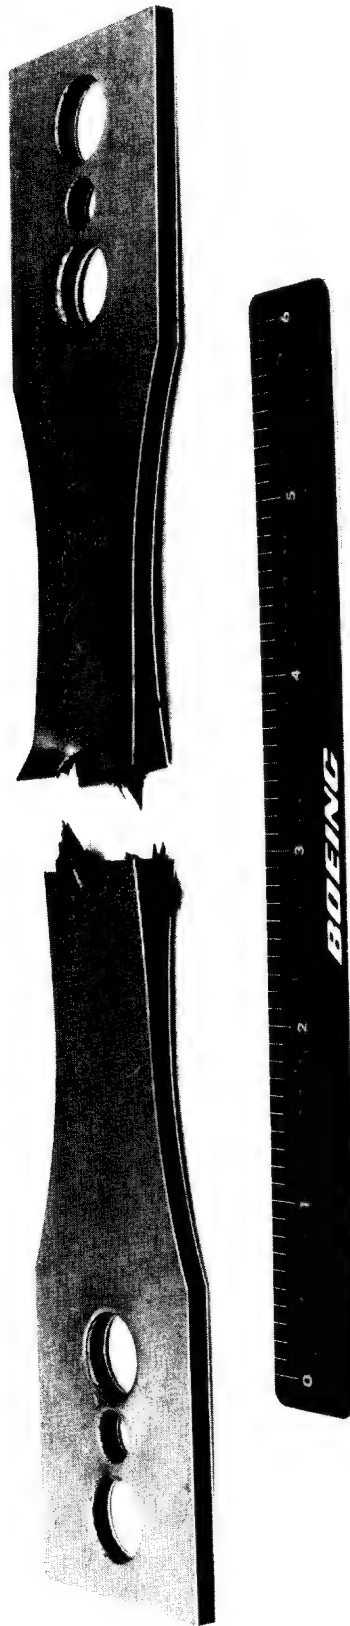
TENSION FATIGUE FAILED SPECIMEN
